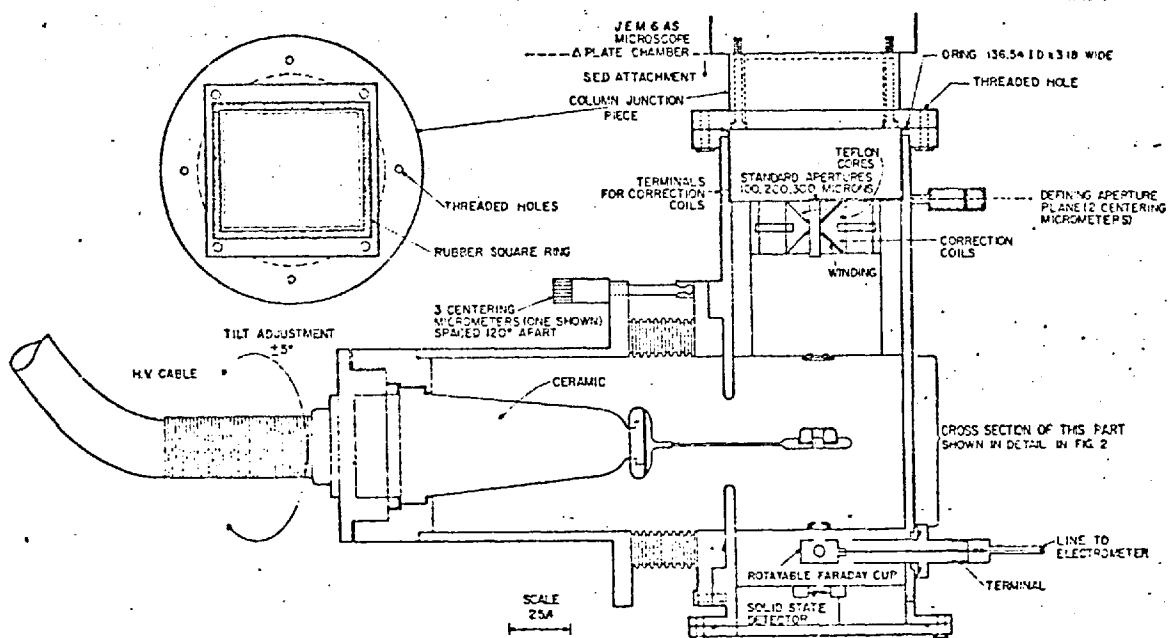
Cross sectional view of the mechanical column of the SED system. All dimensions in millimeters.
